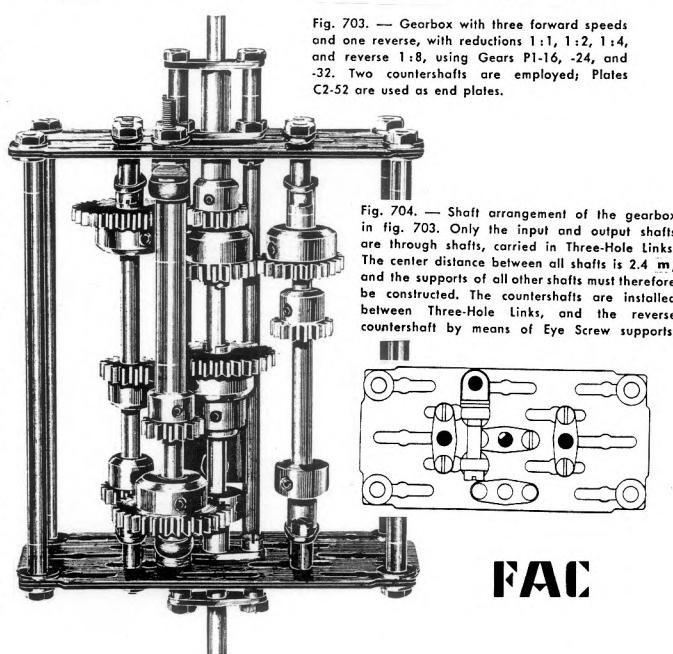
Gearbox with three forward speeds and one reverse, with reductions 1:1, 1:2, 1:4, and reverse 1:8, using Gears P1-16, -24, and -32. Two countershafts are employed; Plates C2-52 are used as end plates.
